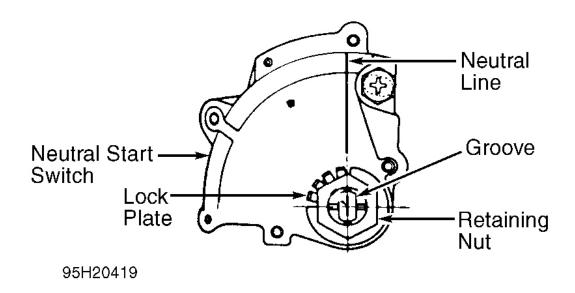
Identifying Neutral Start Switch & Components Courtesy of ISUZU MOTOR CO.
